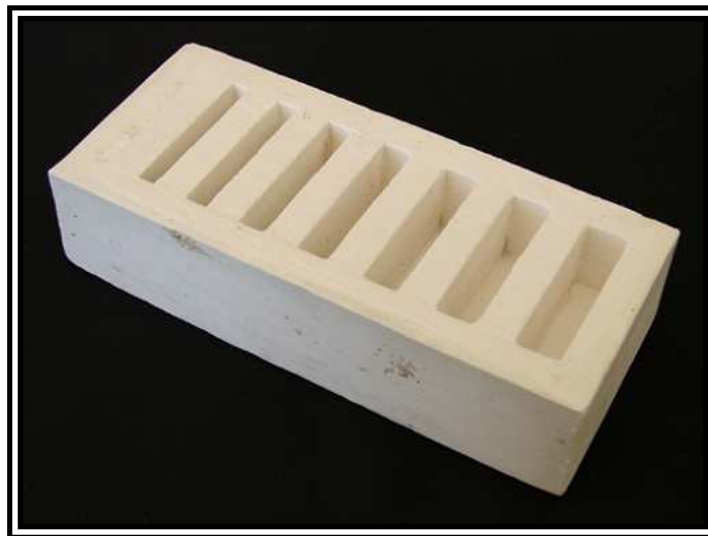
Test geometry 3 – re-test – plaster of Paris mould
